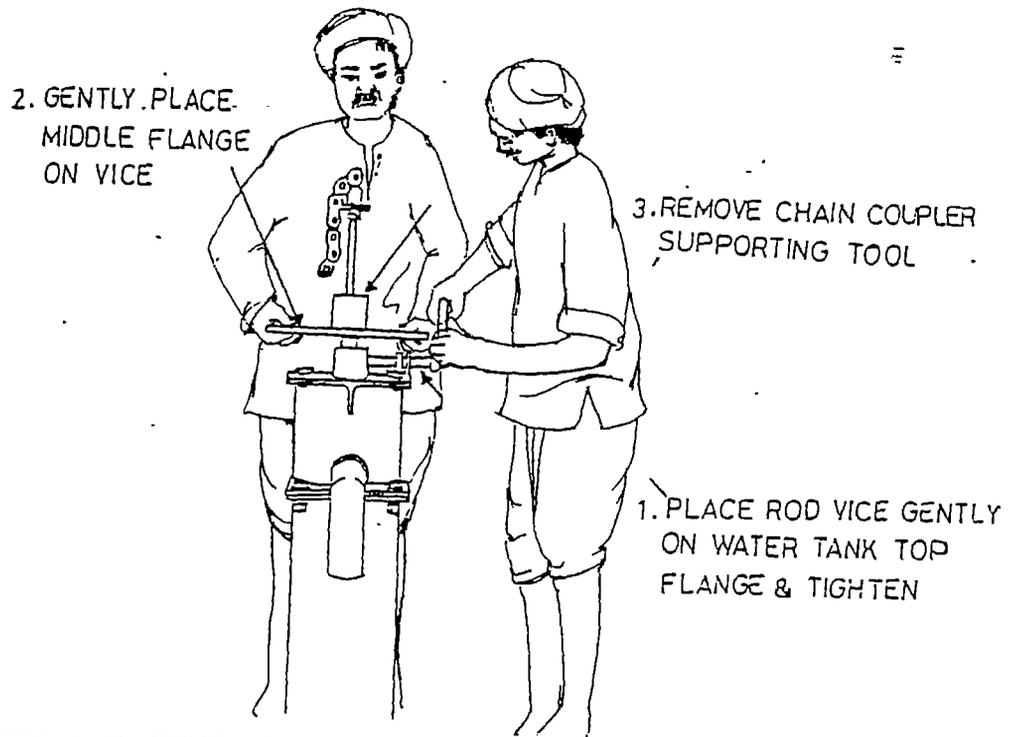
DISCONNECT THE CHAIN ASSEMBLY
